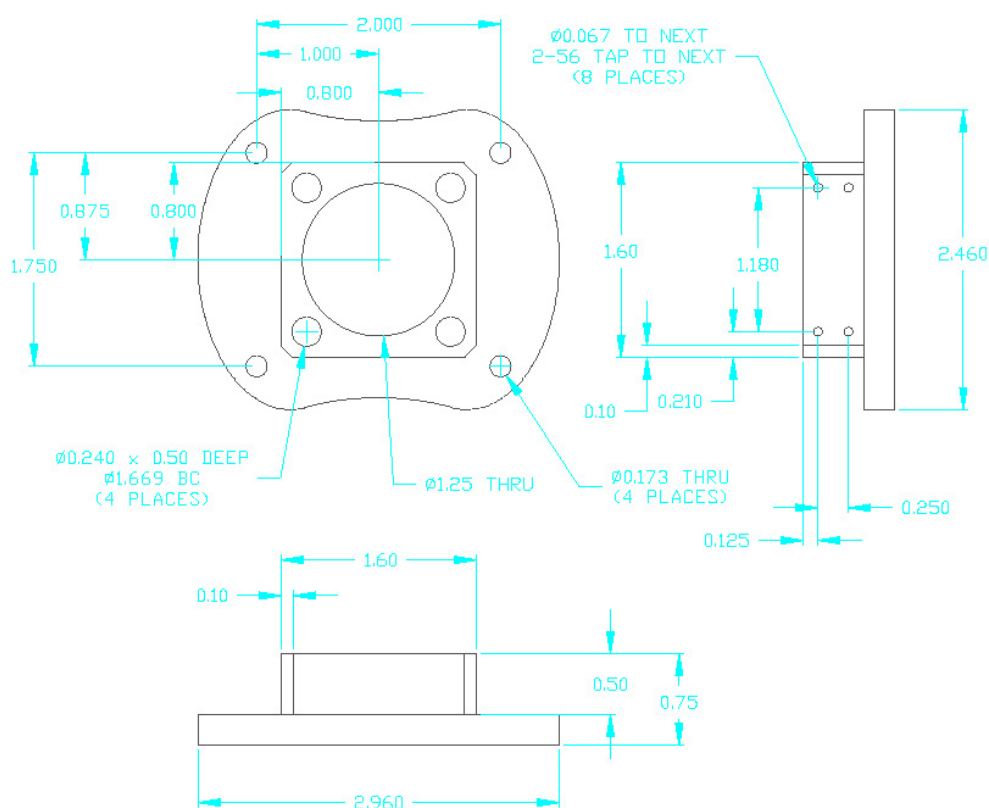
Dimensioned drawing of adapter plate for Phantom camera to Thorlabs 30mm optical cage. Dimensions are in inches.
